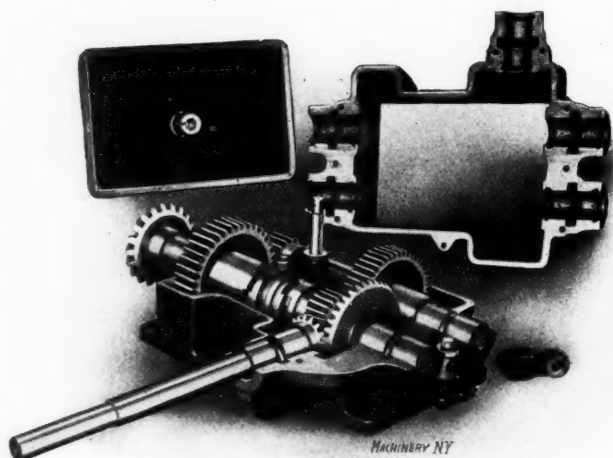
Speed Box, showing Enclosed Mechanism and Ring Oiling Bearings
